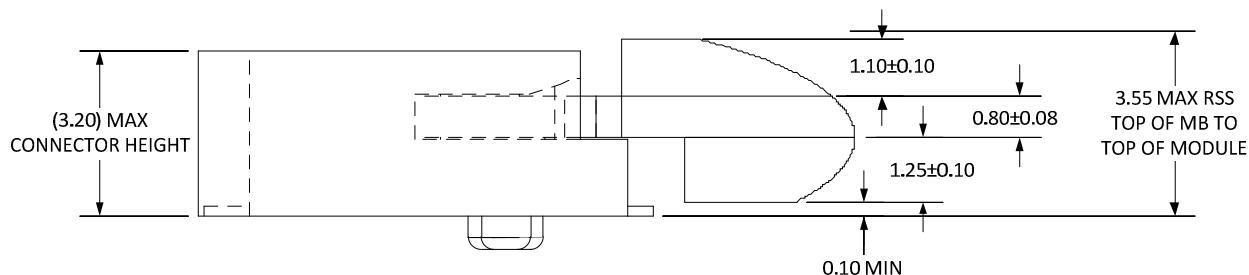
H3.2-D1 - Stack-up Top Mount Double-sided Module for 1.20 Maximum Top-side Component Height
